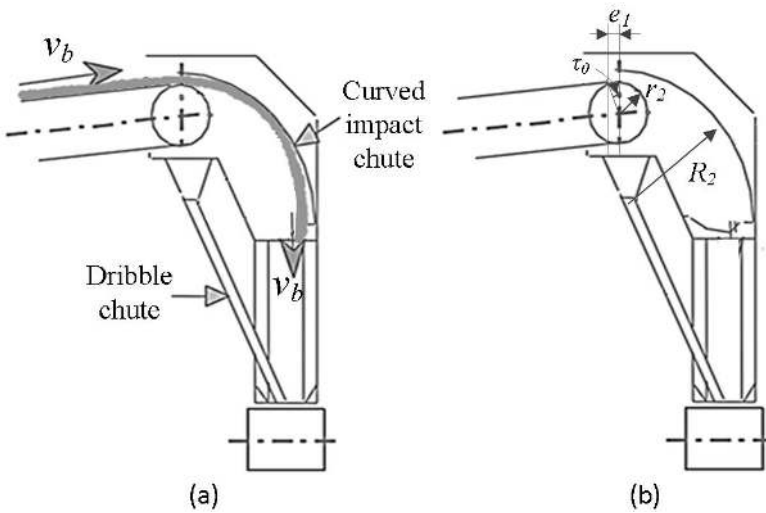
Curved impact chute (a) a part of discharging process (b) dimensions and positions of the used equipment [4]
